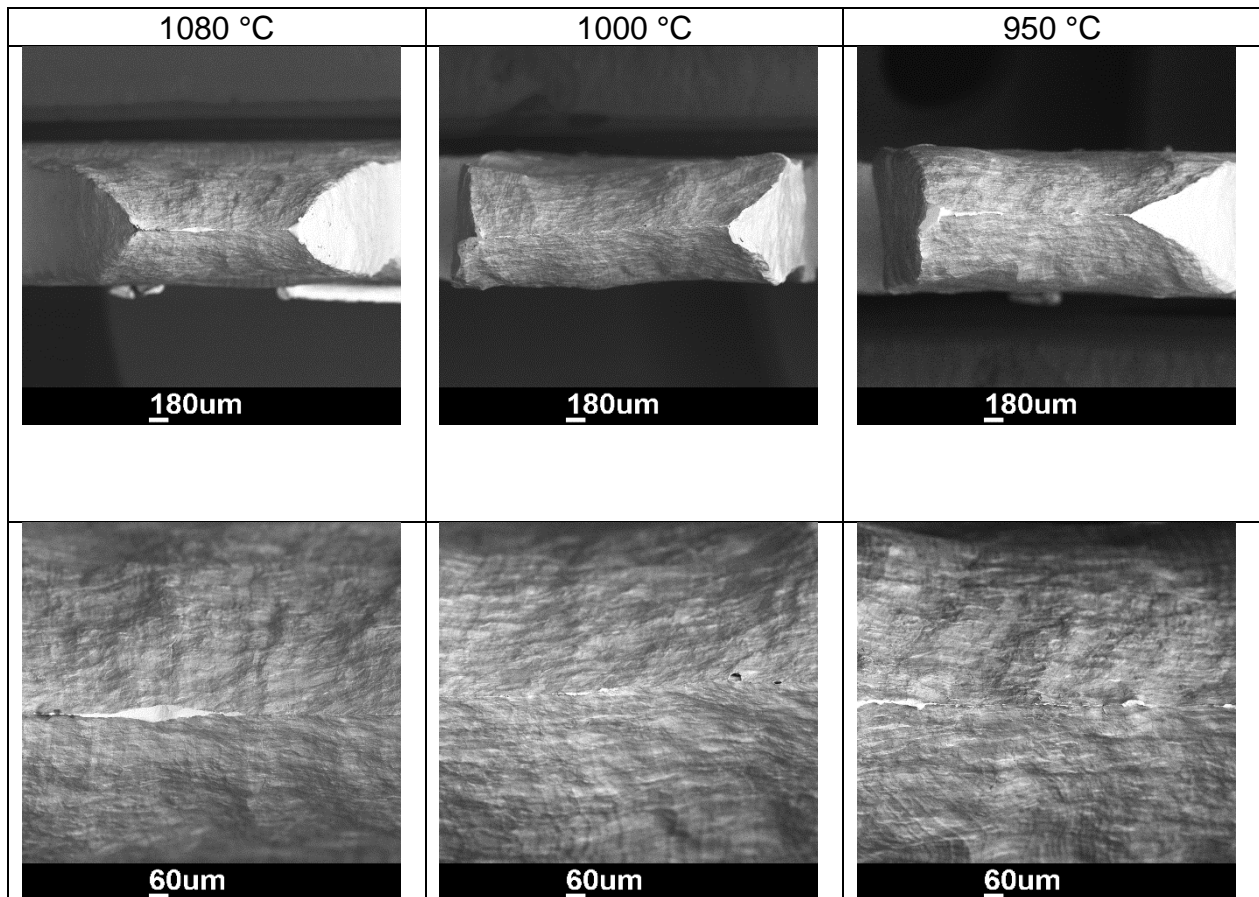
Fracture surface after Cycle-1, Alloy-0
